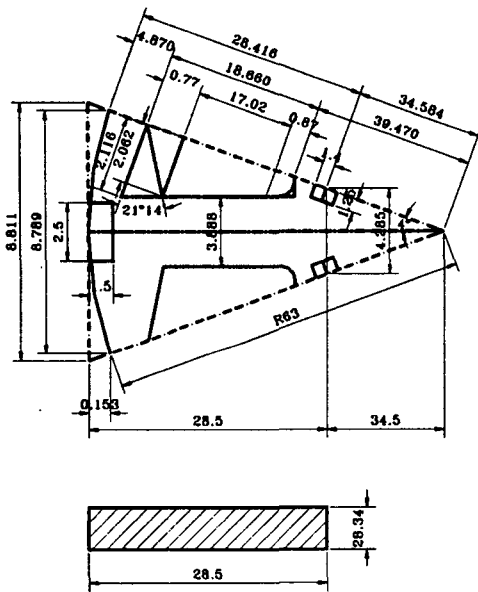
Drawing of rotor slot die generated in die-layout module
